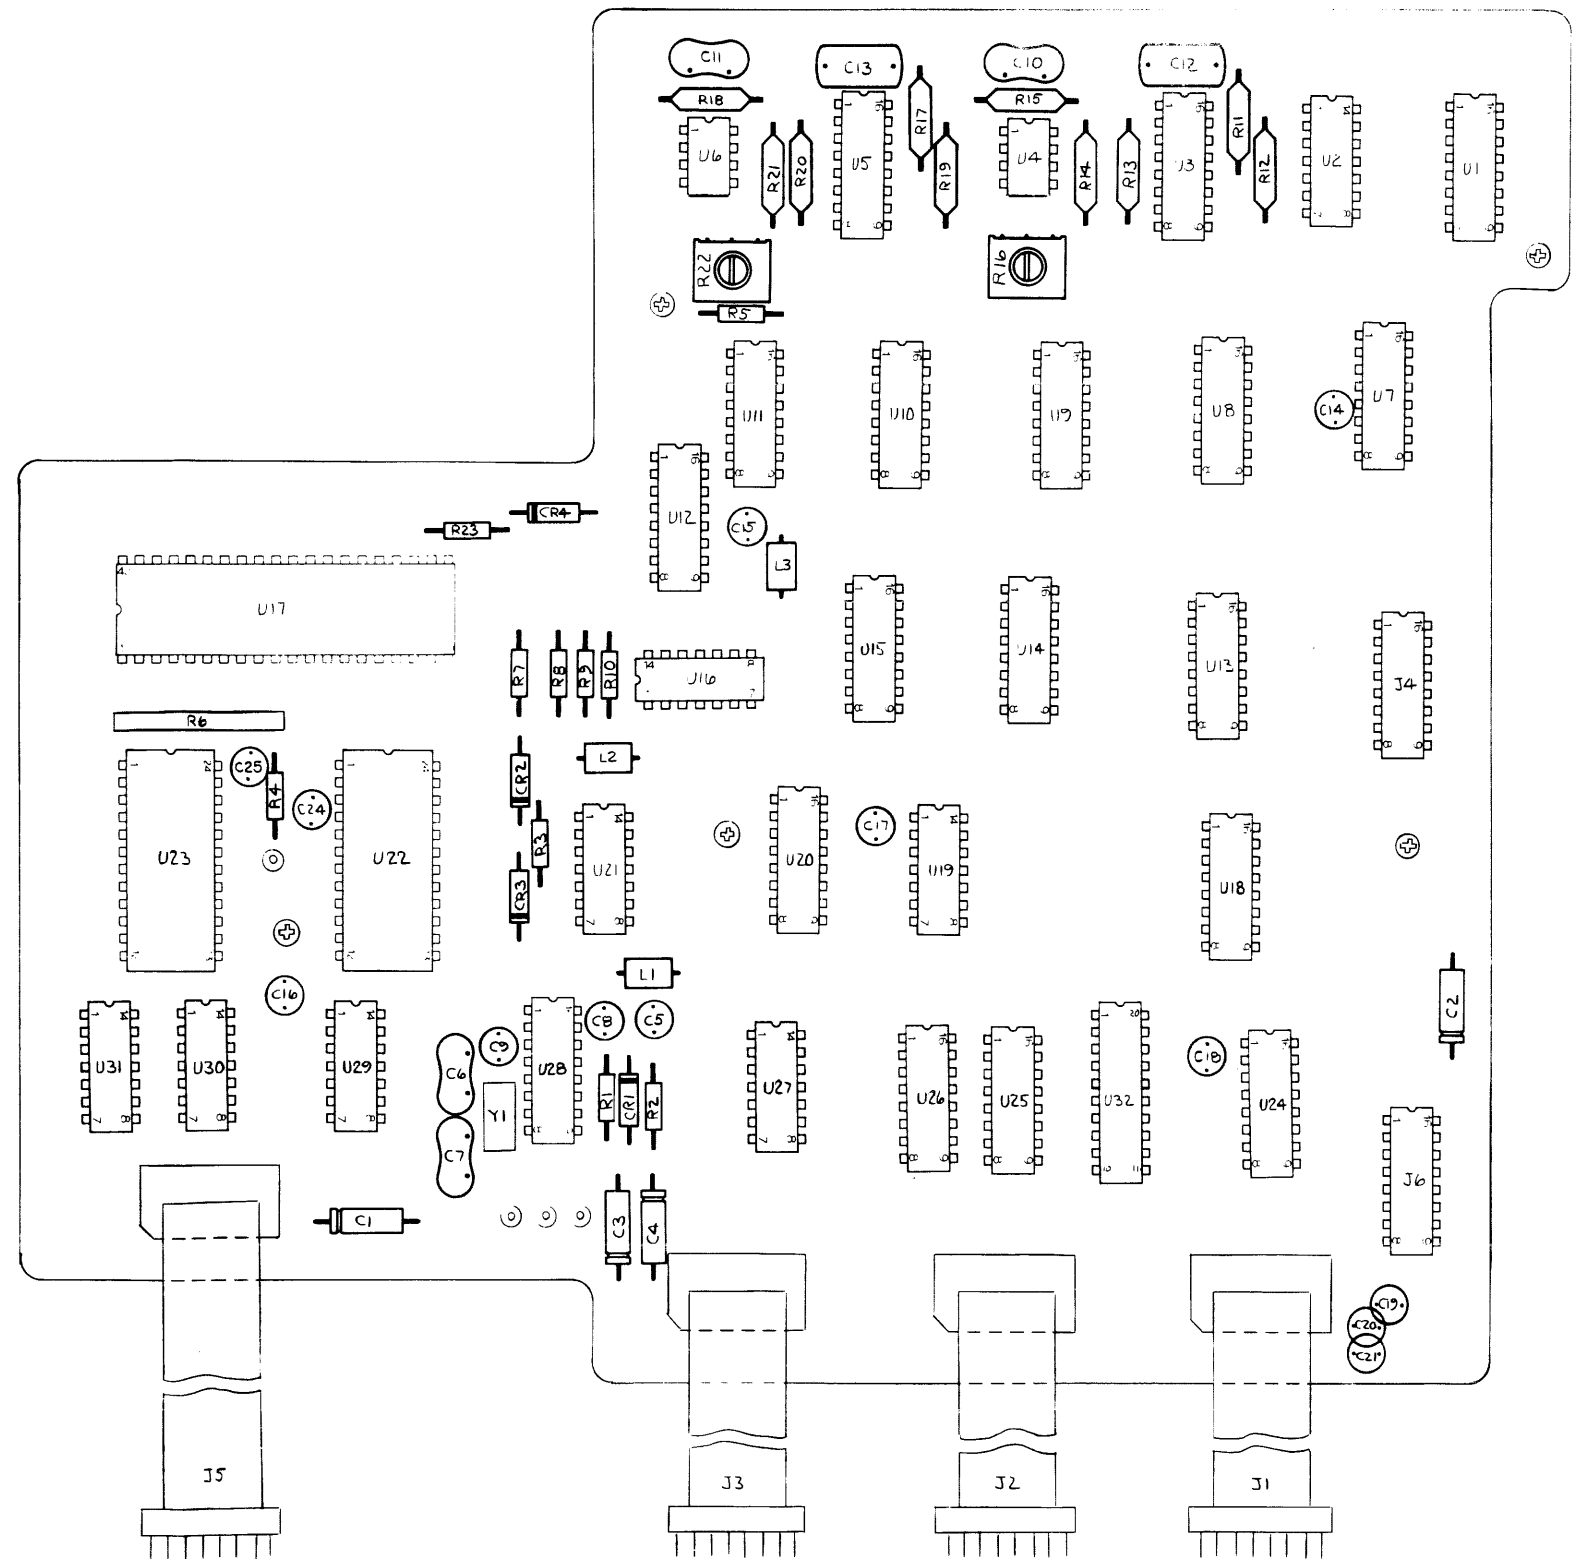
A17 IEEE-488-1975 Processor PCB Assembly, -15 Option
